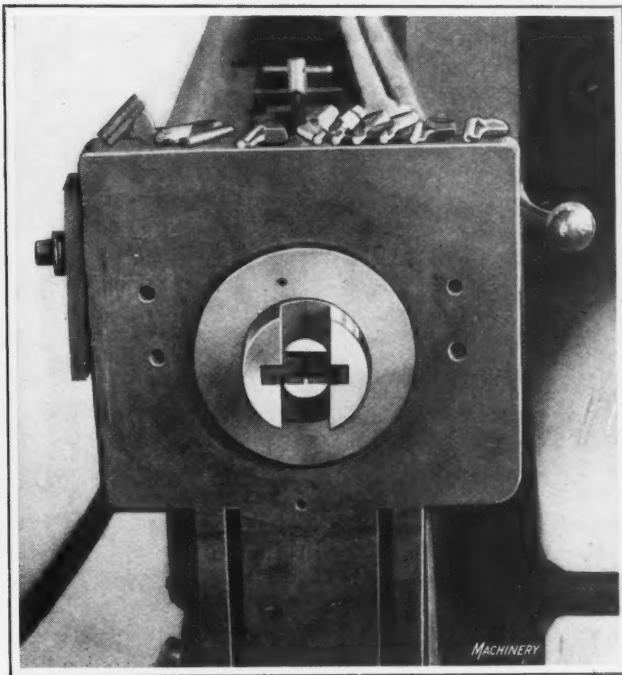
Broaching Machine at Completion of Cut, with Work removed
